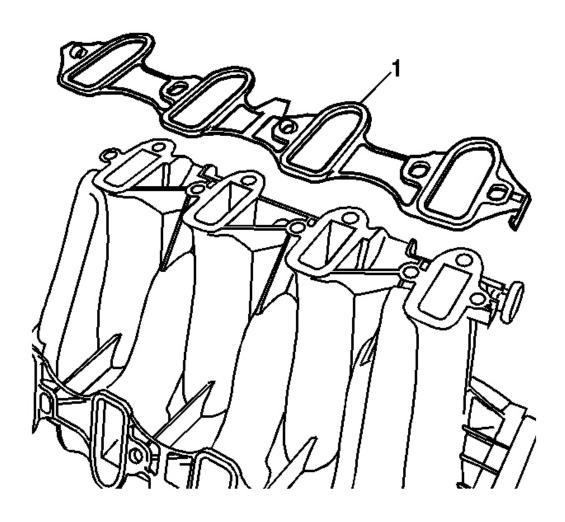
View Of Intake Manifold Gasket Courtesy of GENERAL MOTORS CORP.
